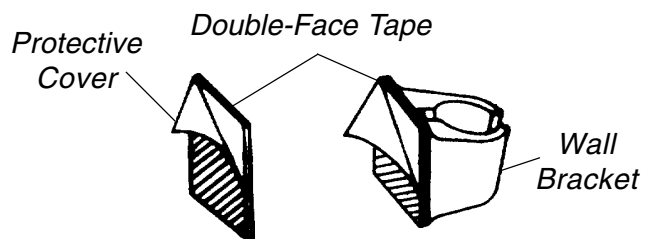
DOUBLE-FACE TAPE INSTALLATION
